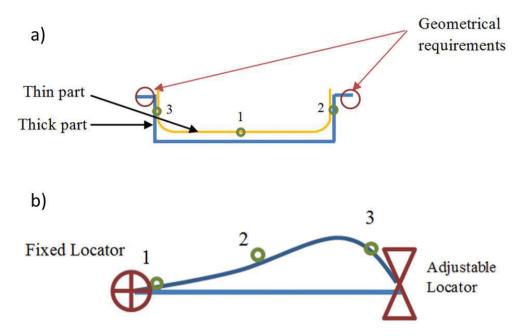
Two typical cases when a spot welding sequence should be chosen. The green circles with numbers indicate different welding points.
